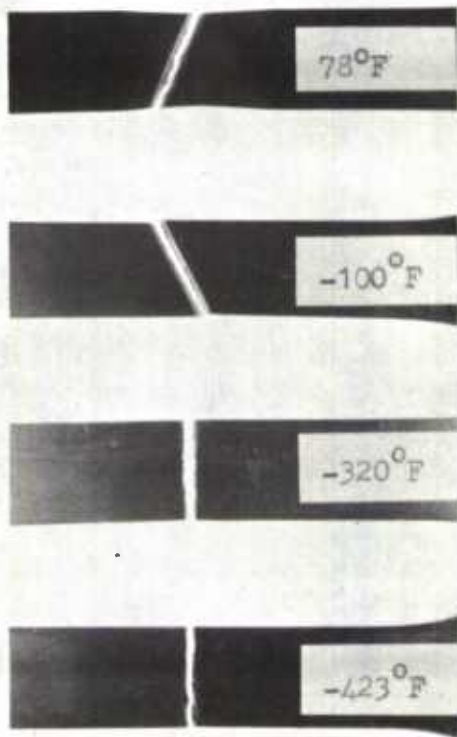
Photomicrographs of Fractured Tensile Specimens (301 and 304 Stainless Steels)
